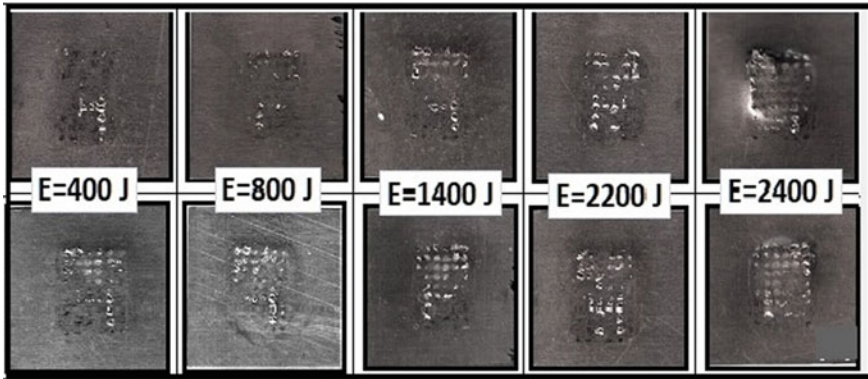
Fractured specimens in the tensile–shear strength test showing increasing weld area with increasing weld energy
